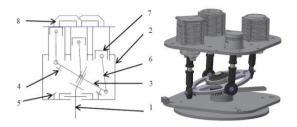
Mechanism FIK: 1- shaft, 2- crankcase, 3- swinging plate, 4- bevel wheel (part of swinging plate), 5 bevel wheel (part of crankcase), 6- ball joint segment, 7- piston, 8- head cylinder and regenerator pipe
